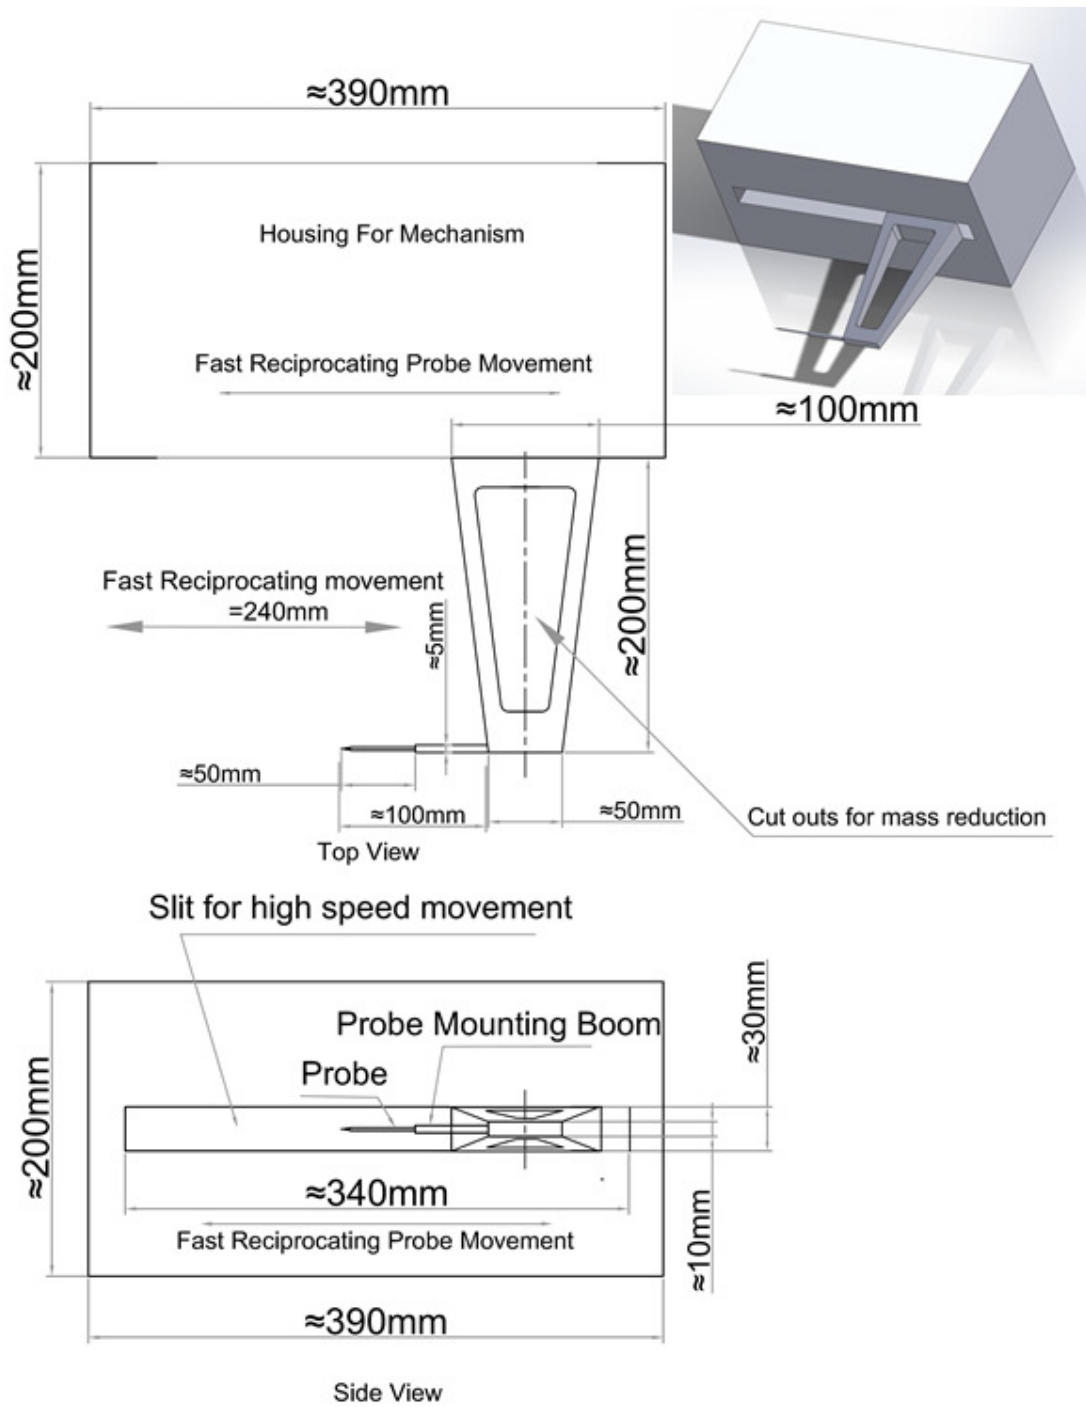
Feasible Near-Field Probe positioning Mechanism with approximate dimensions also shown is the 3D view
